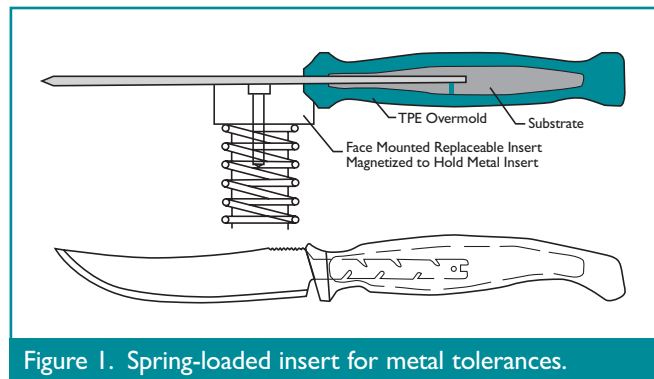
Spring-loaded insert for metal tolerances.
